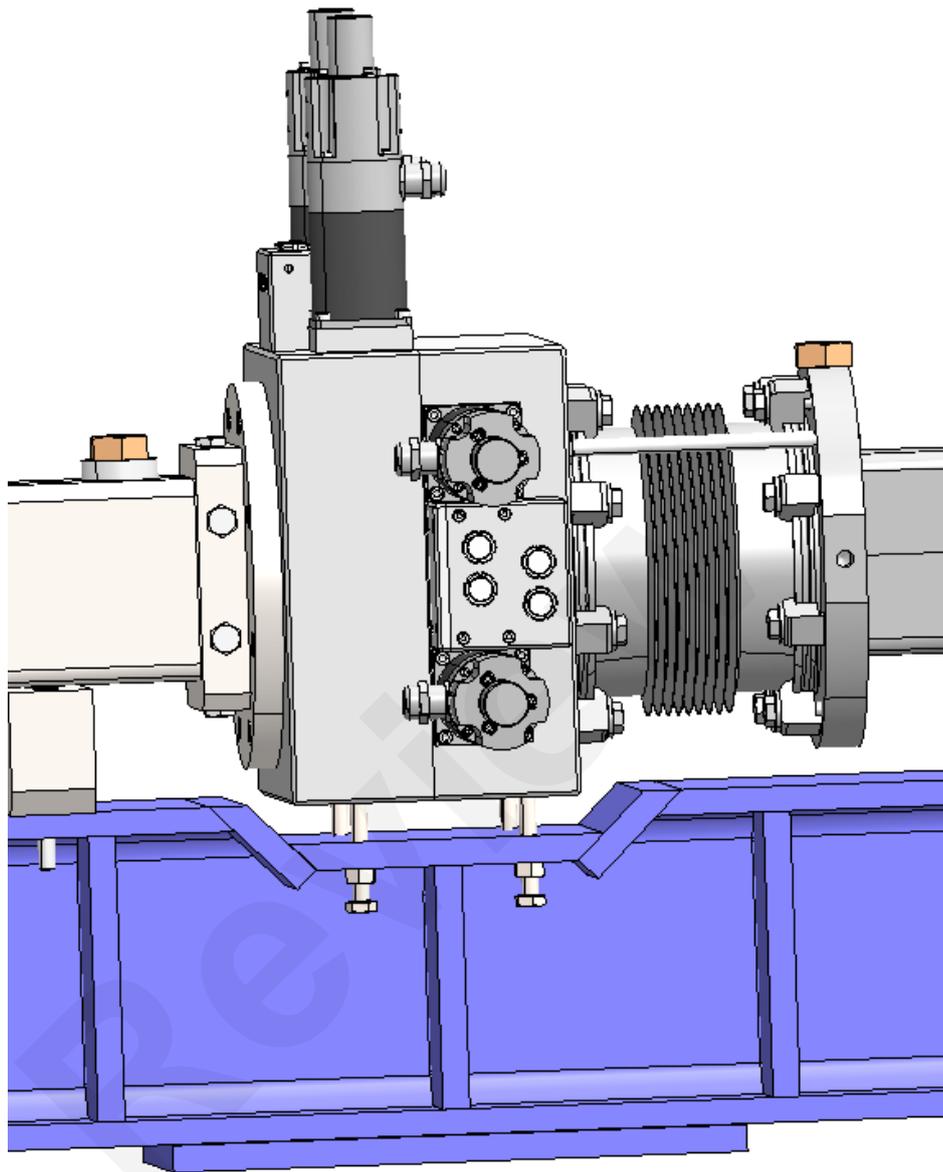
Cut-out form the I-beam at SL1, it is reinforced with welded ribs.
